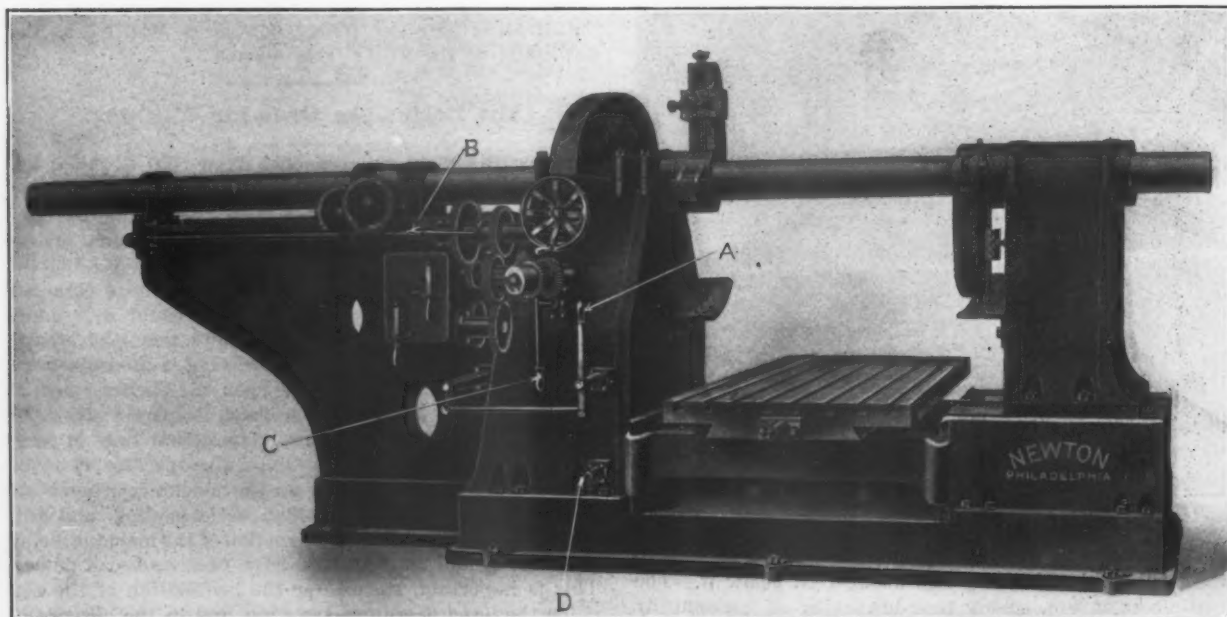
A Special Cylinder and Valve Chamber Boring Machine Built by the Newton Machine Tool Works, Philadelphia, Pa.
